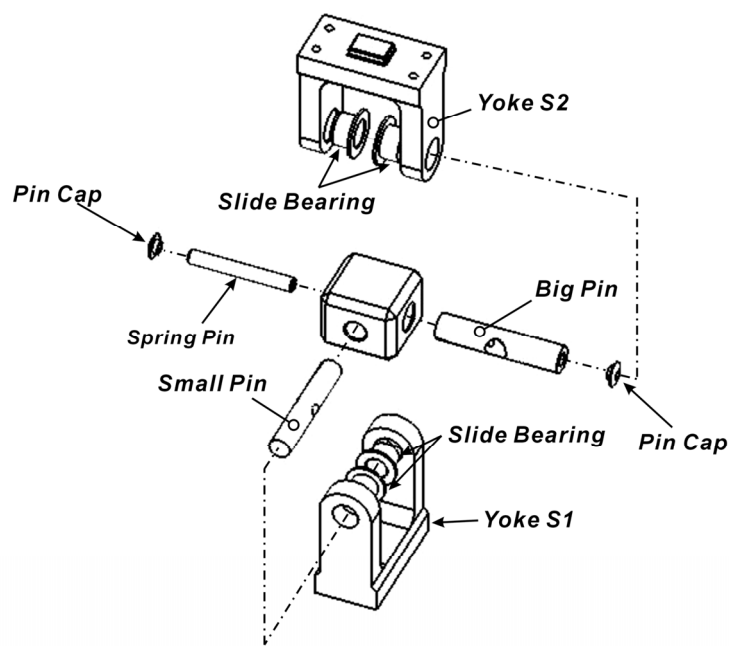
Exploded view of upper 2-DOF passive joint.
